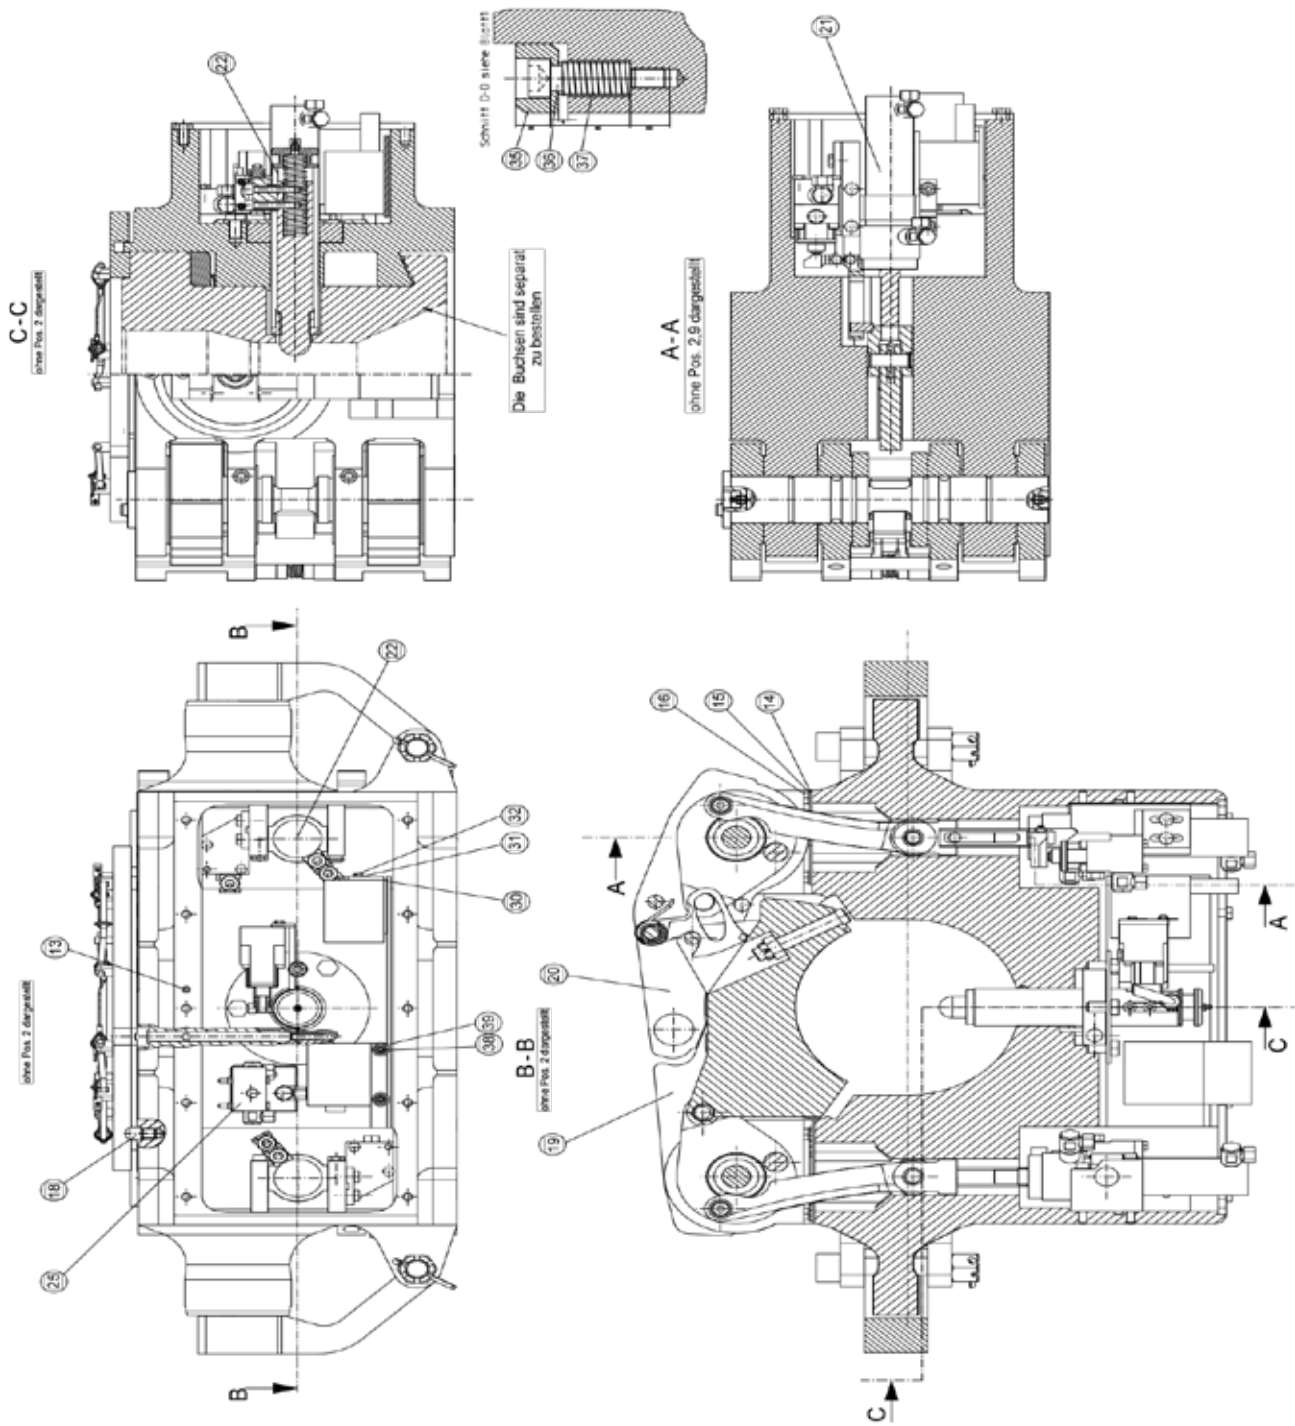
Drawing 635000-Y VES-SD 350 Page 2
